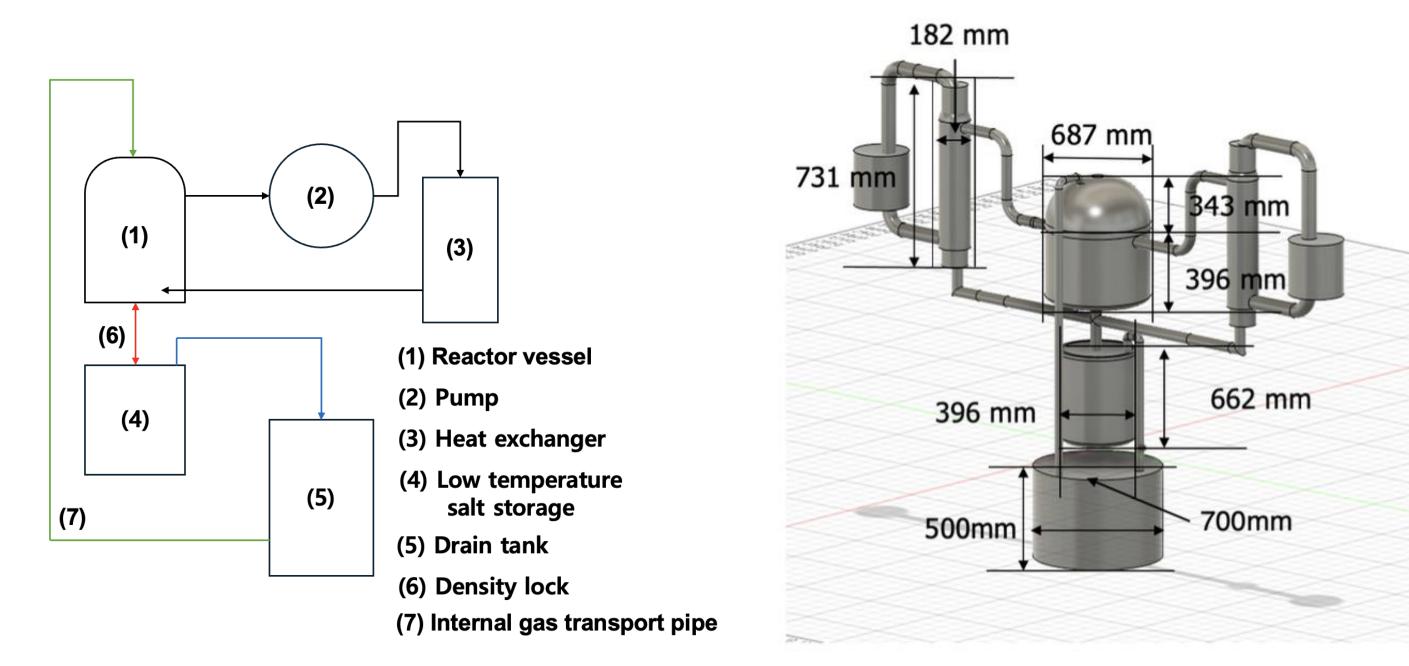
Two-dimensional and three-dimensional drawing of the designed experimental apparatus
